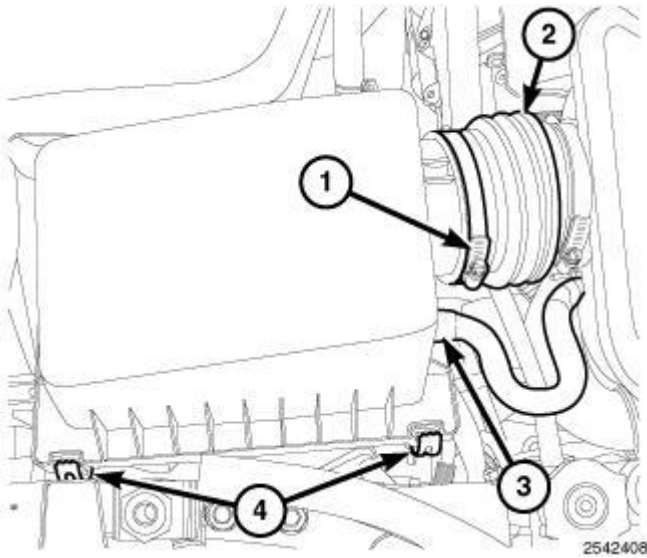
Air Duct Clamp At Air Cleaner Cover
